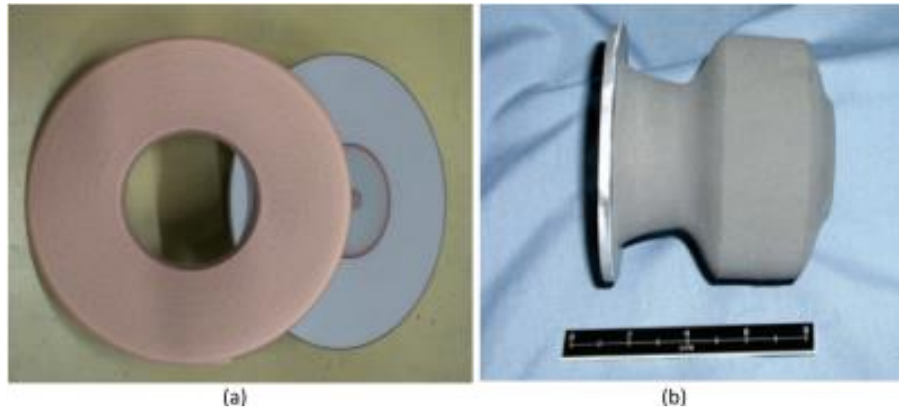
(a) Cold spray forming of coil components for high magnetic field magnets (inhouse product) and (b) rapid prototyping of Ti6Al4V axisymmetric bulk part [34]
